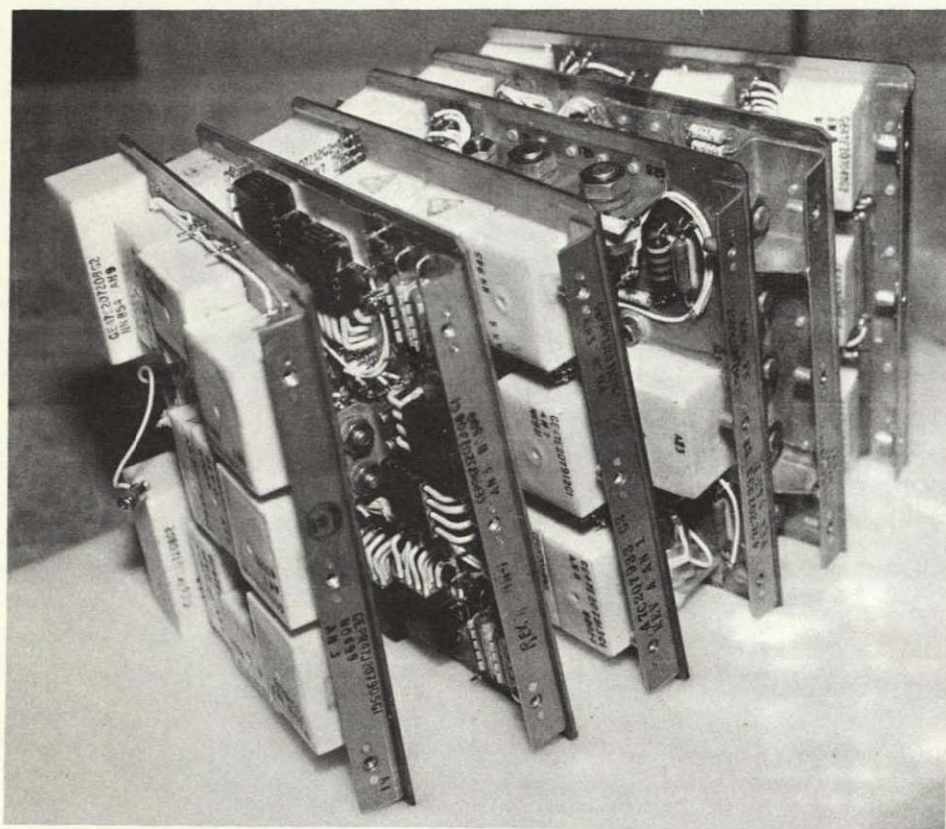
PCU Wiring Boards for the First Flight Unit Shown During Assembly
